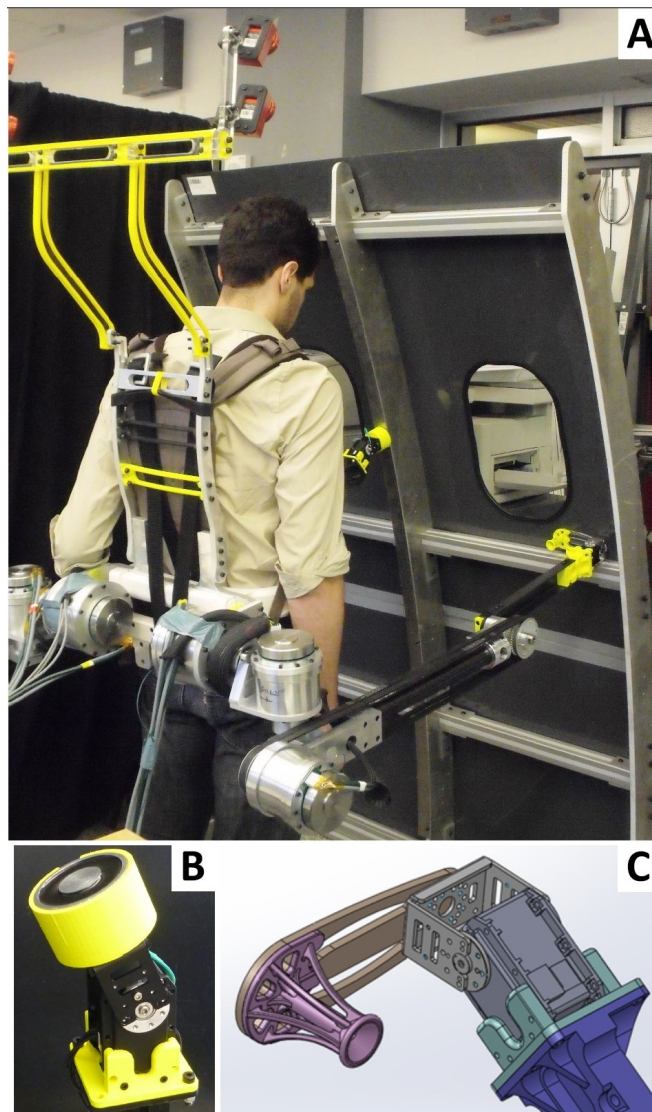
A) The SRL prototype used in a drilling task. B) The electromagnet used to establish contact with the environment. C) The drill jig end effector. In the middle of the purple element there is a hole (bushing) whose function is to guide the drill bit.
